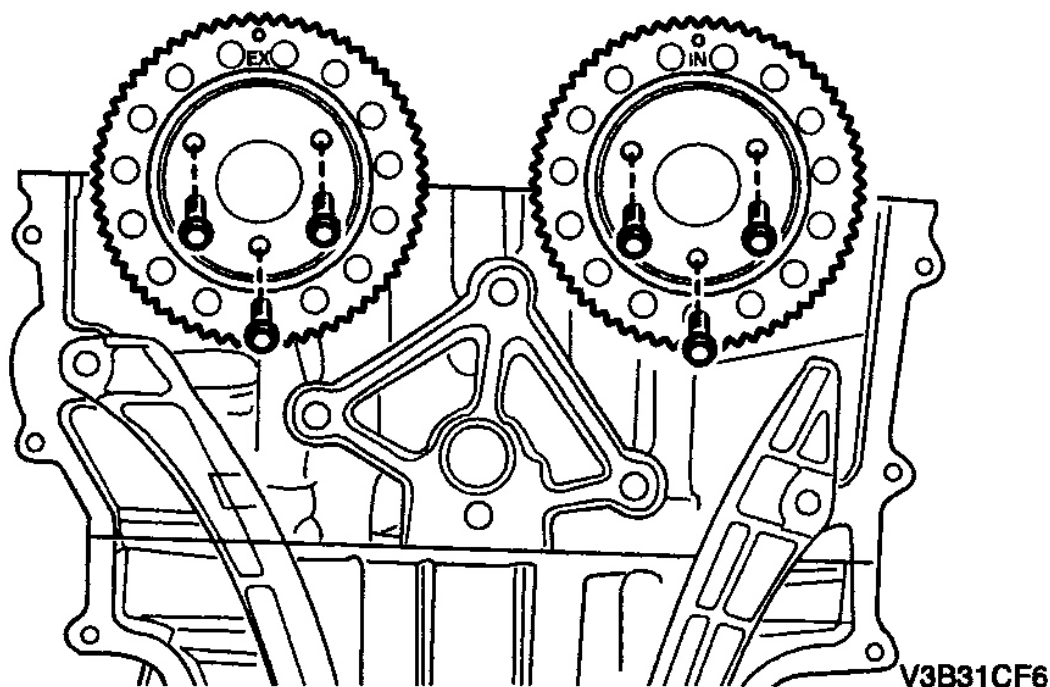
Removing Intake And Exhaust Cam Sprocket
